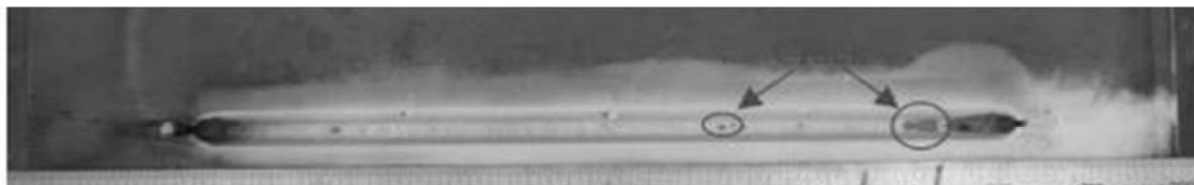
Top surface of hot crack testing specimens after liquid penetrant testing
